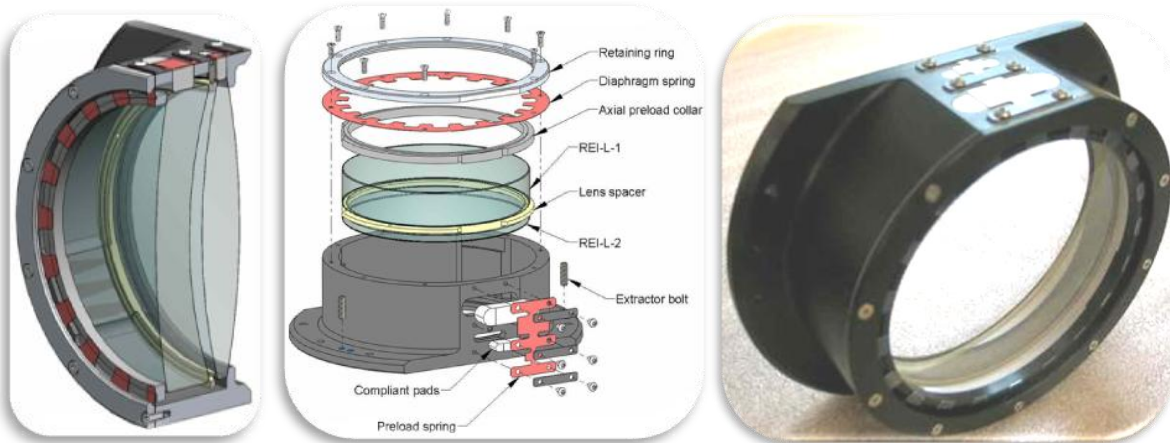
NESSI re-imaging lens 1 and 2 – cut-away and exploded views, and as-built assembly.
